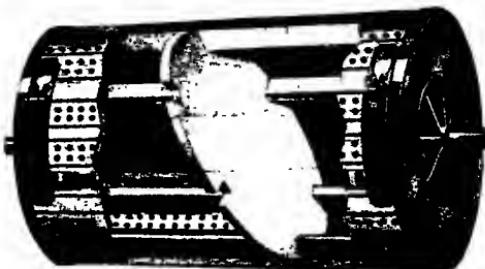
“TROY” RAPID WASHER. INNER CYLINDER.
